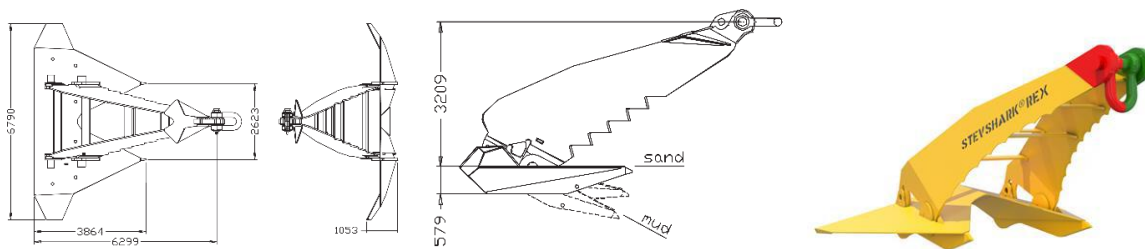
Example of Drag Embedment Anchor (a Vryhof StevShark Mrk-5 - Courtesy of Vryhof)
